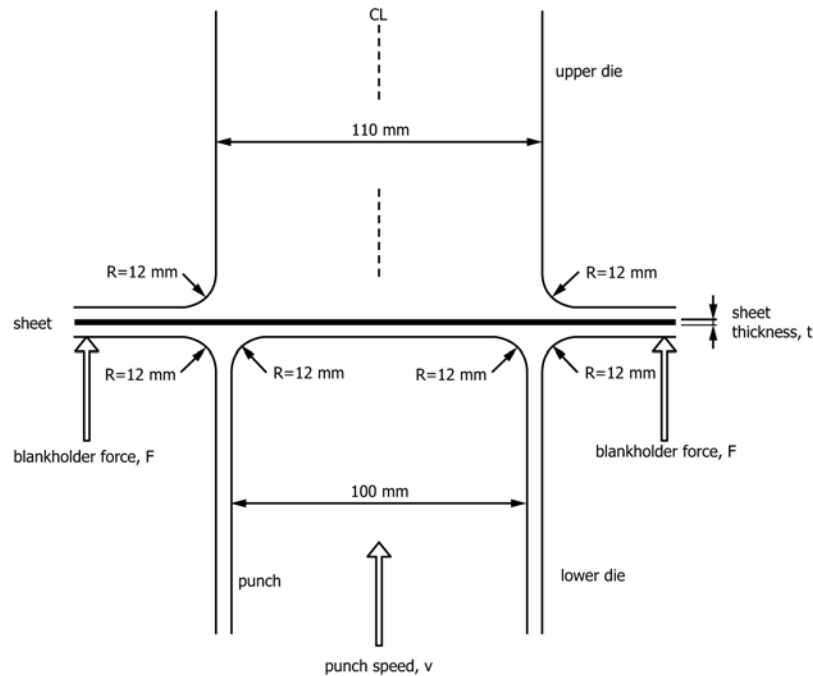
Cross Section Through the Experimental Setup Used for Cup Drawing
